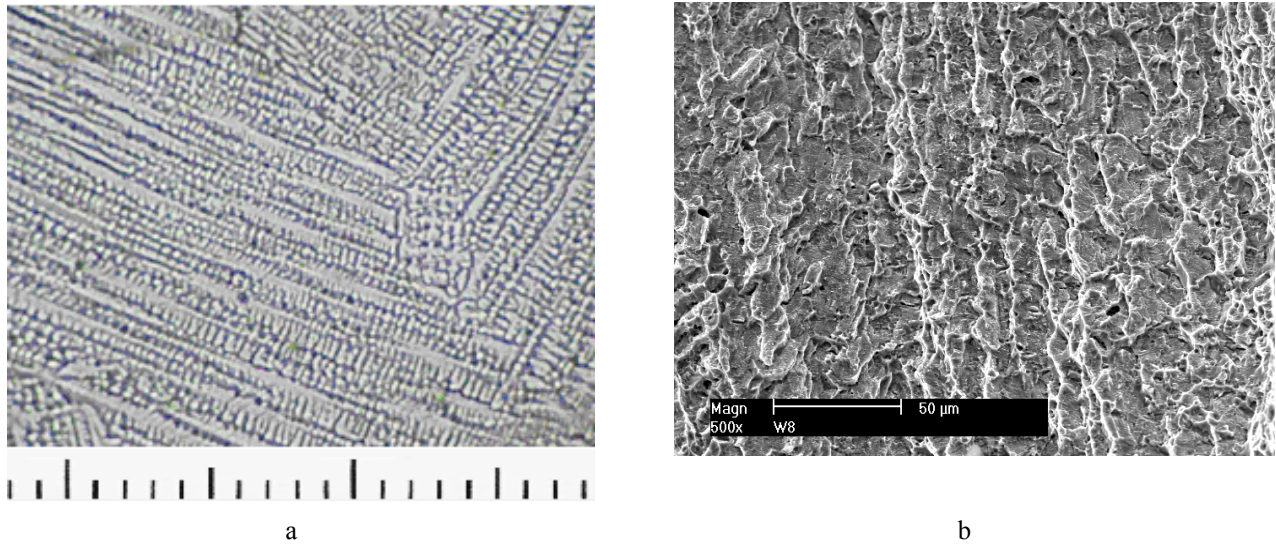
The microstructure of weld metal (a, mark size – 1 mm) and the fracturegram of the weld (b) obtained during the welding of grade 08X25T steel by the austenitic electrodes Cromarod 310
